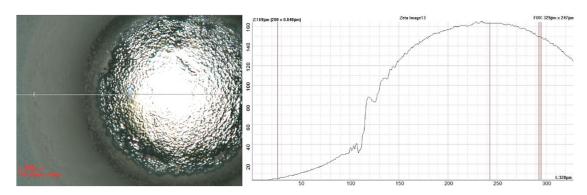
Measured profile of a paste-printed BGA ball after reflow.
